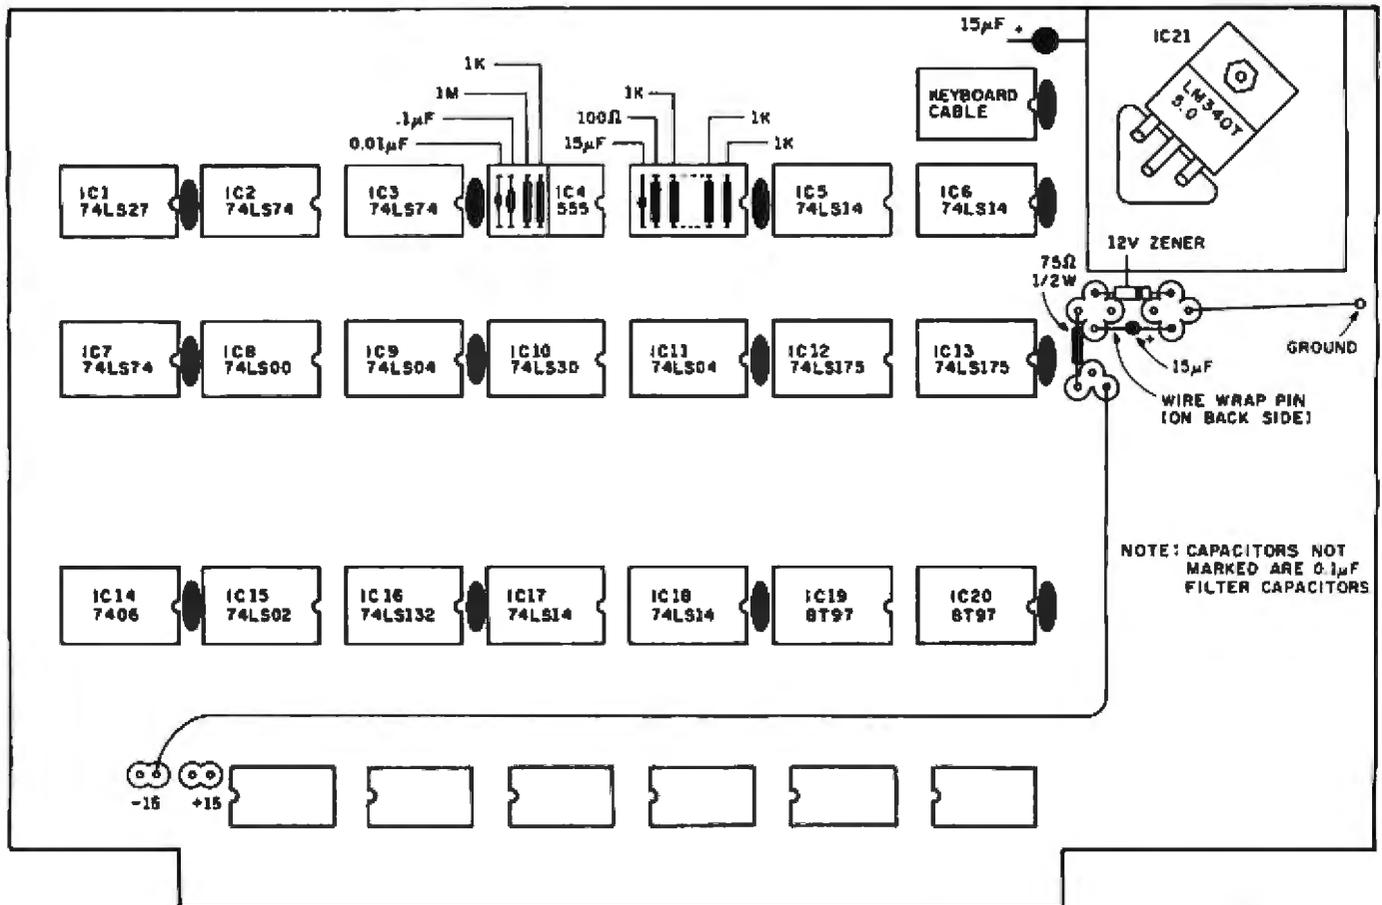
Component placement for the interface board. The ceramic disk despiking capacitors referred to in figure 2 are shown between the integrated circuit sockets.
